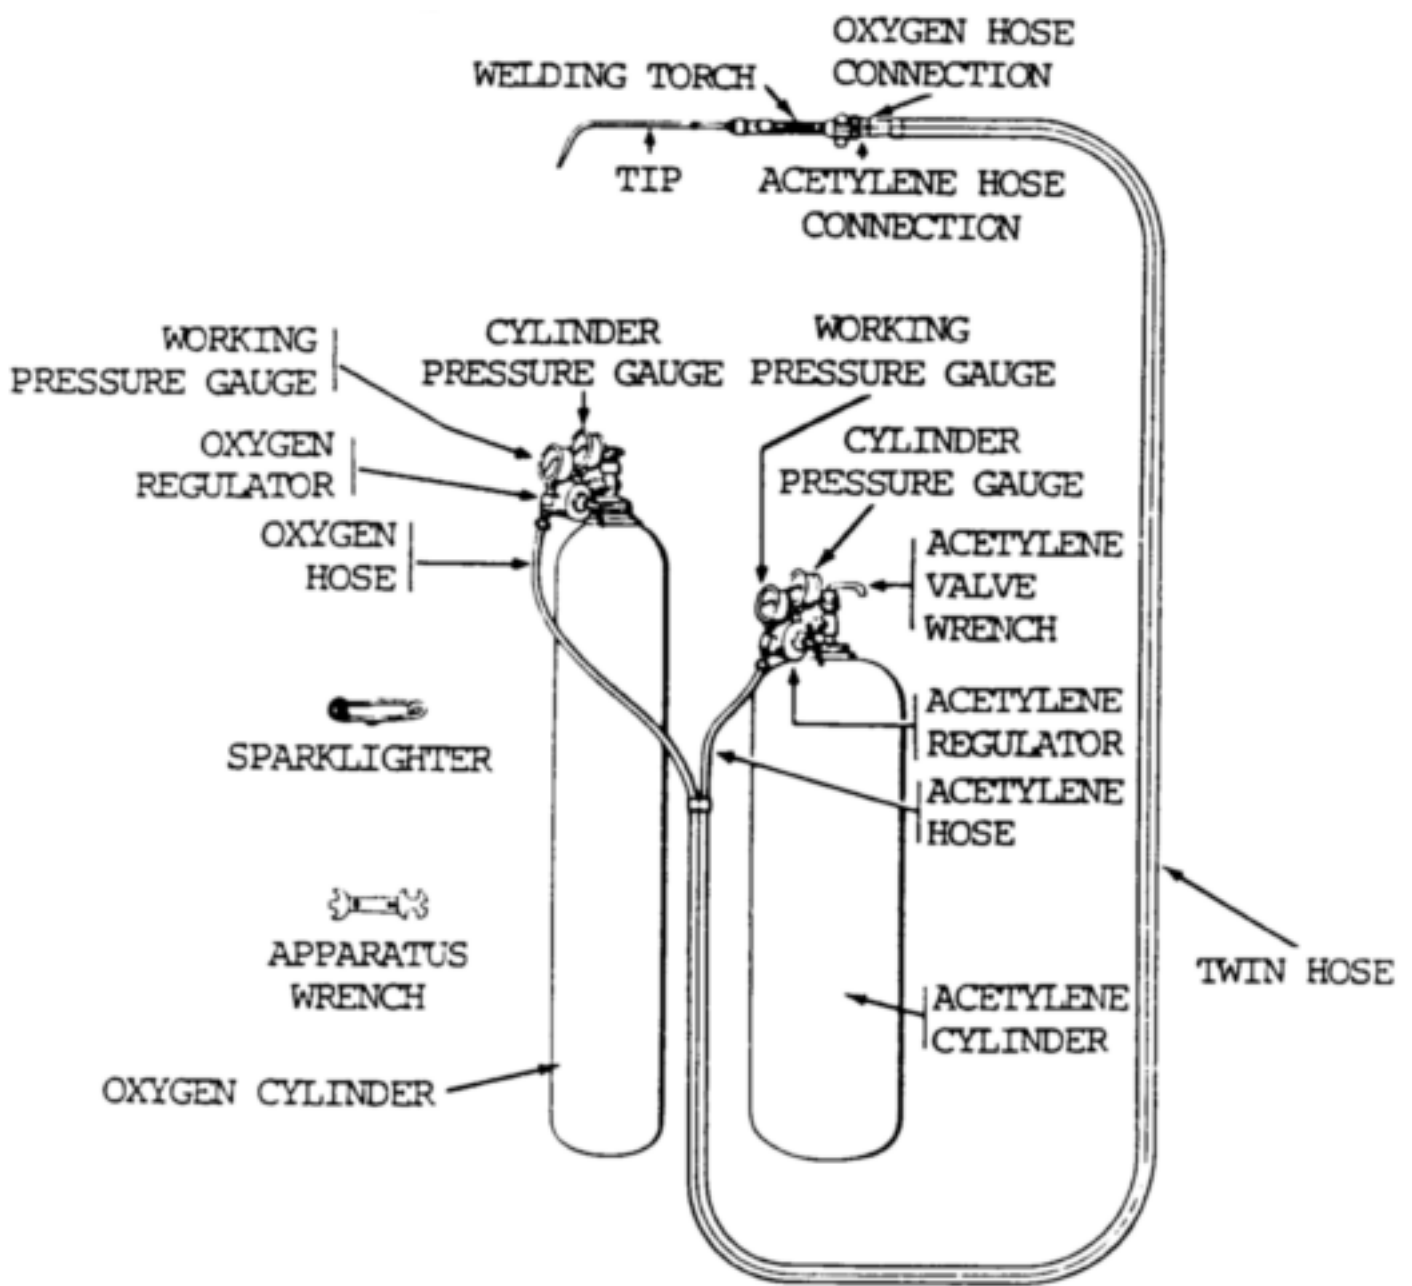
Portable oxyacetylene welding and cutting equipment.
